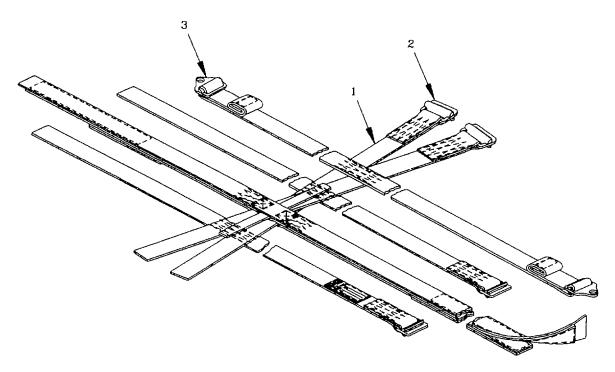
SLING ASSEMBLY, EQUIPMENT ATTACHING
